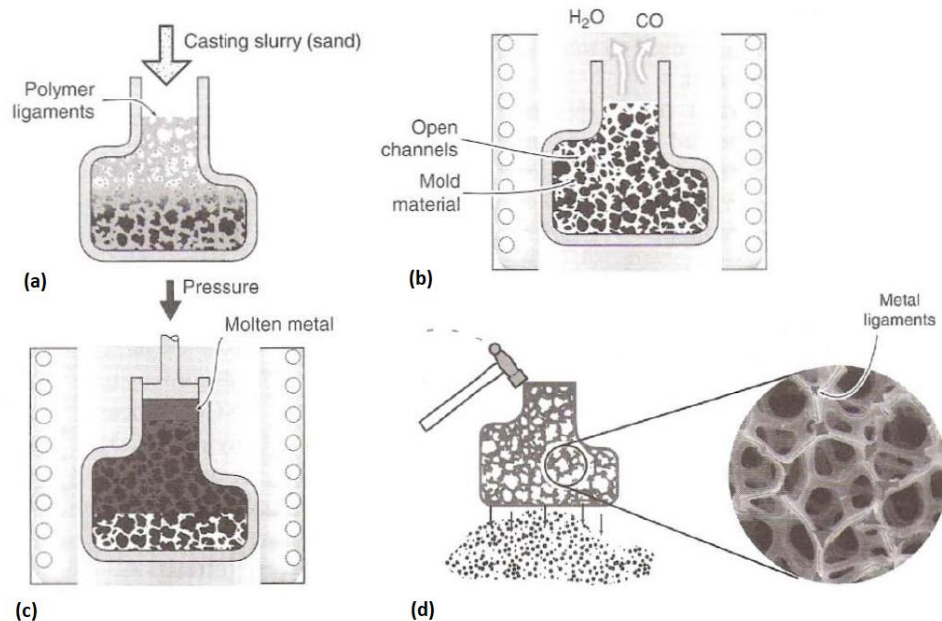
Investment casting method to manufacture open cell foams (DUOCEL process) (a) Preform (b)Burnout (c) Infiltrate (d) Remove mold material. (M.F. Ashby, A.G. Evans, N.A. Fleck, L.J. Gibson, n.d.)
